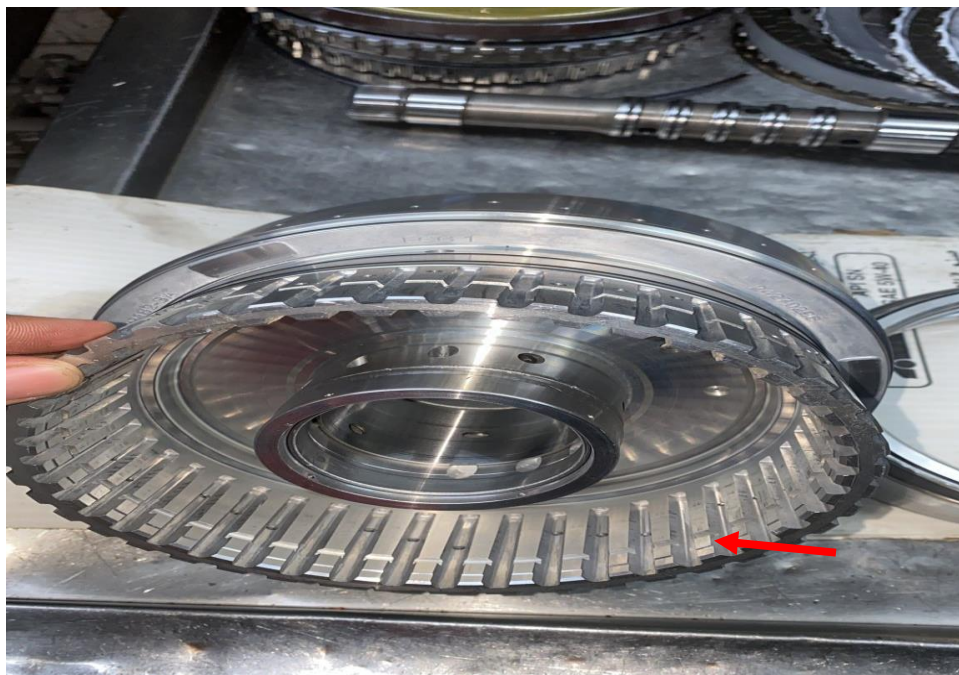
shows the close up view of inside the gearbox unit of the Insured Vehicle at the time of our inspection. The shafts component (arrowed) in the gearbox unit is observed to be unaffected and by any signs of accident.
